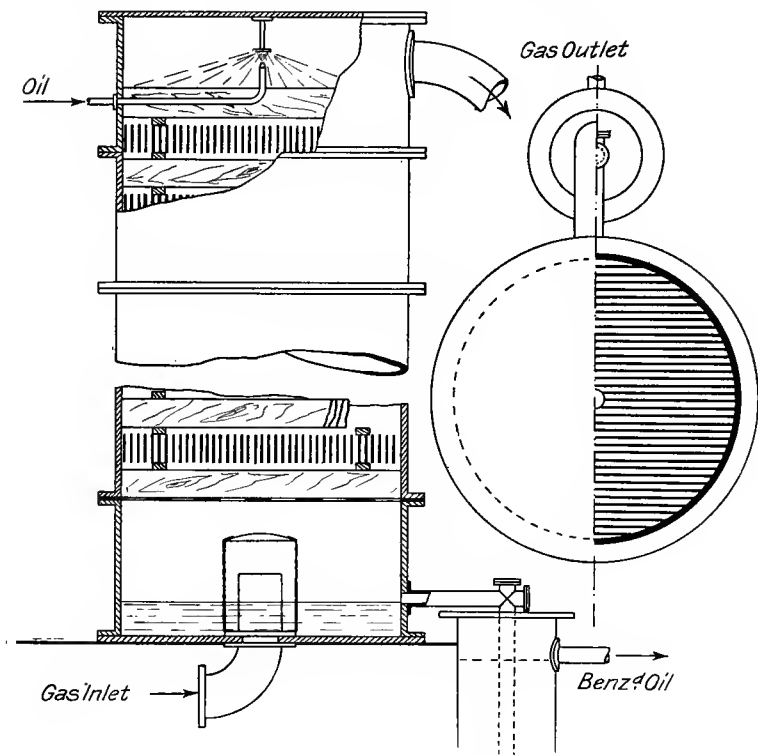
TOWER SCRUBBER WITH BOARD FILLING.
